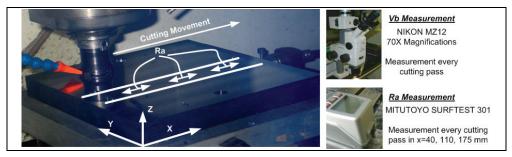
Machining process and surface roughness and tool-wear sampling.
